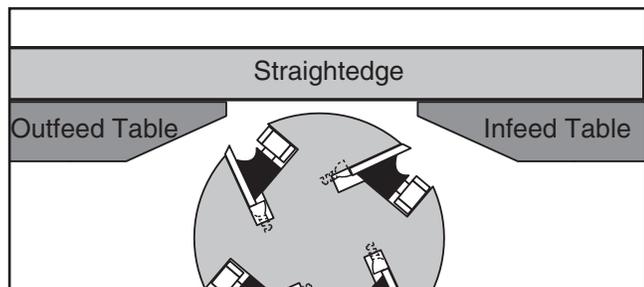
Infeed and outfeed tables set evenly (knife-style cutterhead shown).
